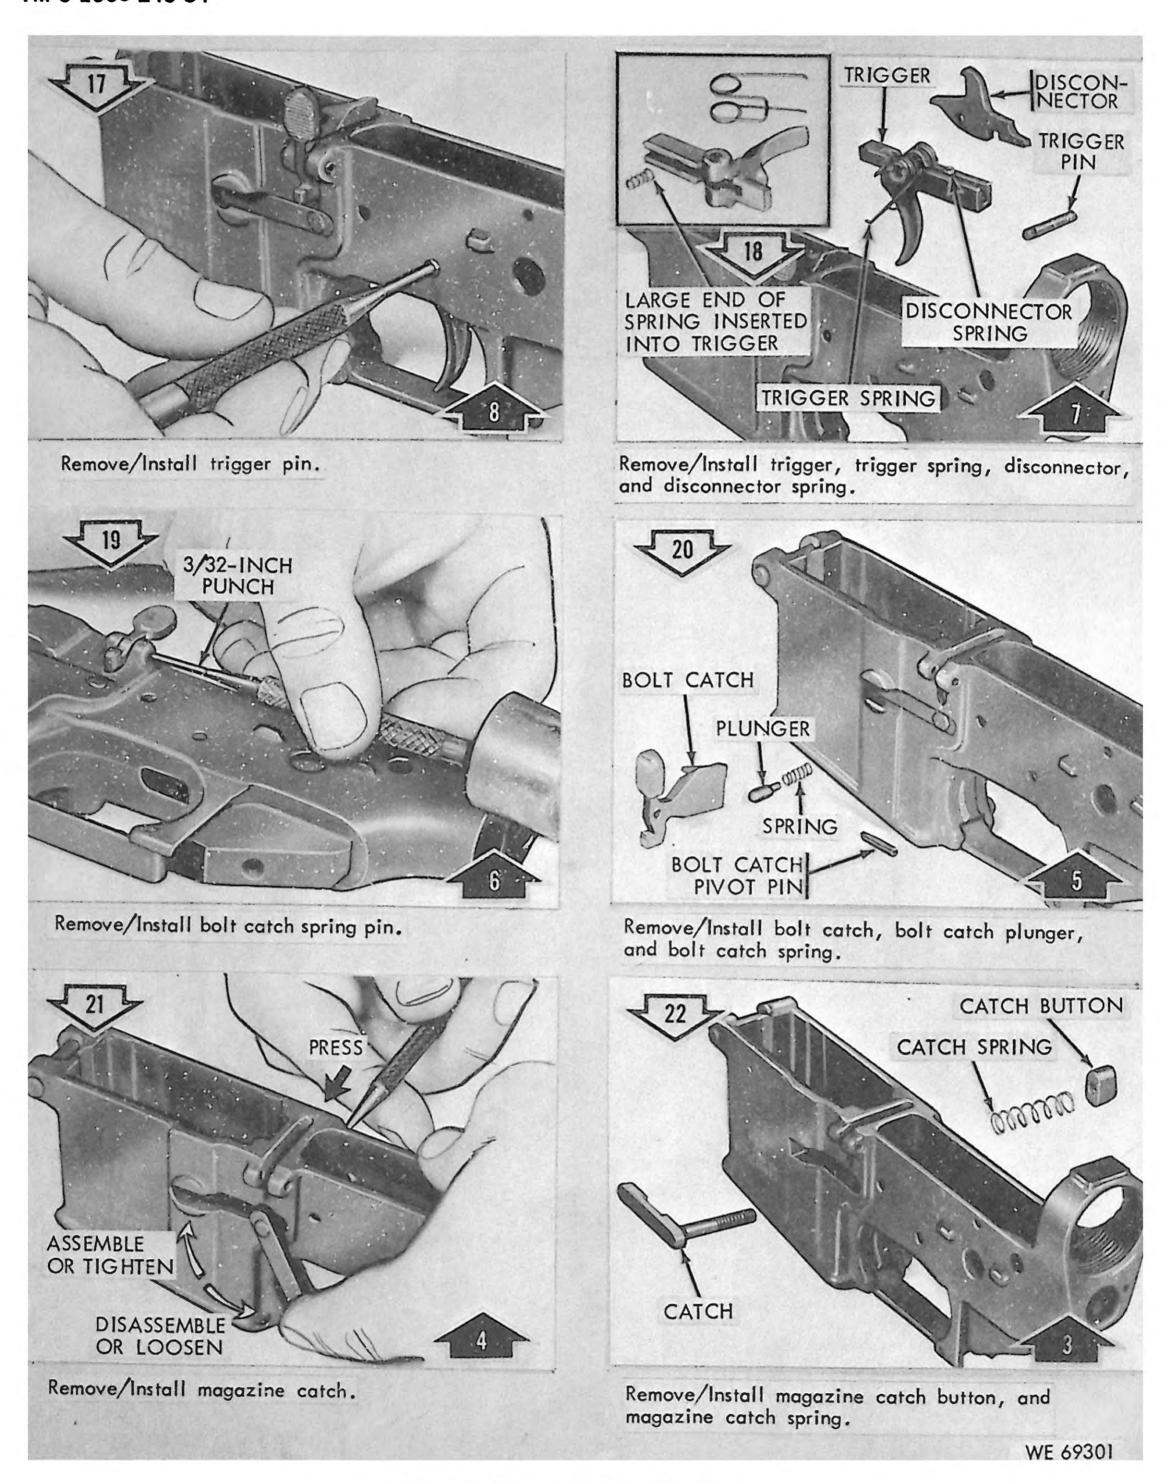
Disassembly/assembly of lower receiver group. (4 of 5)
